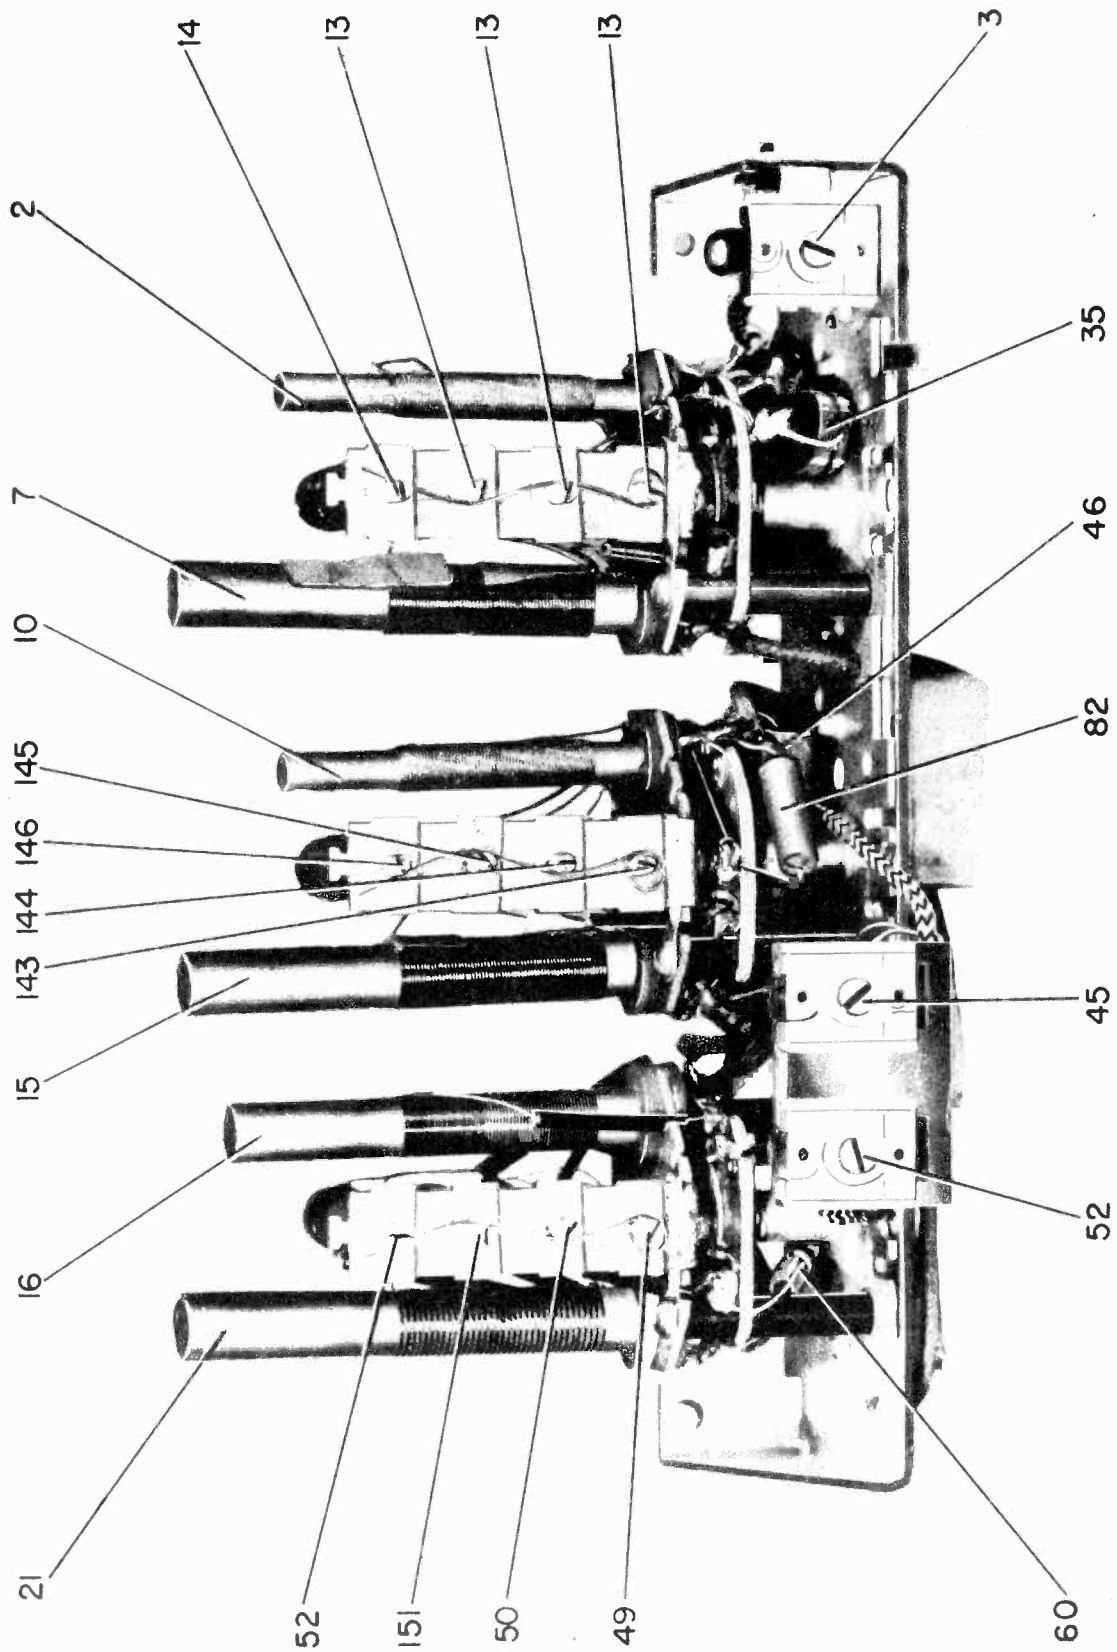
COIL ASSEMBLY (BOTTOM VIEW)—RADIO 985794
